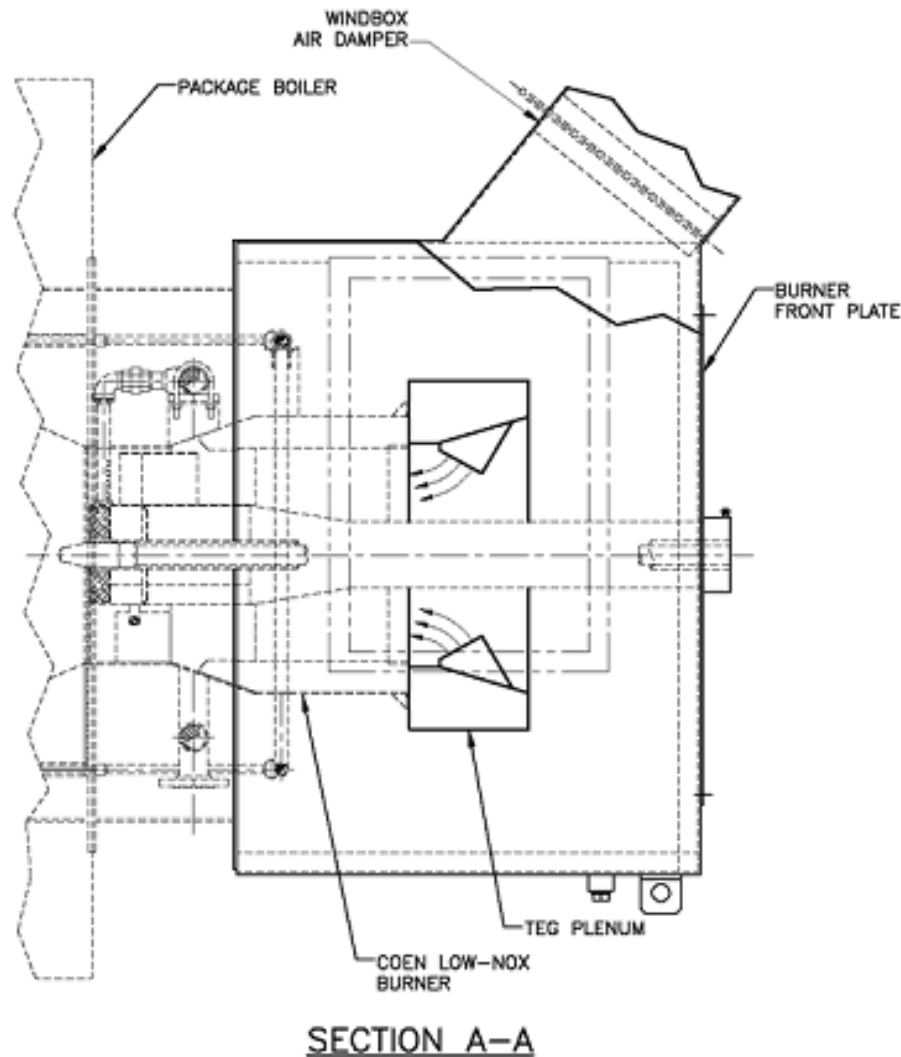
Prototype Design of Microturbine Interfaced with Burner Windbox and Burner - Side View
